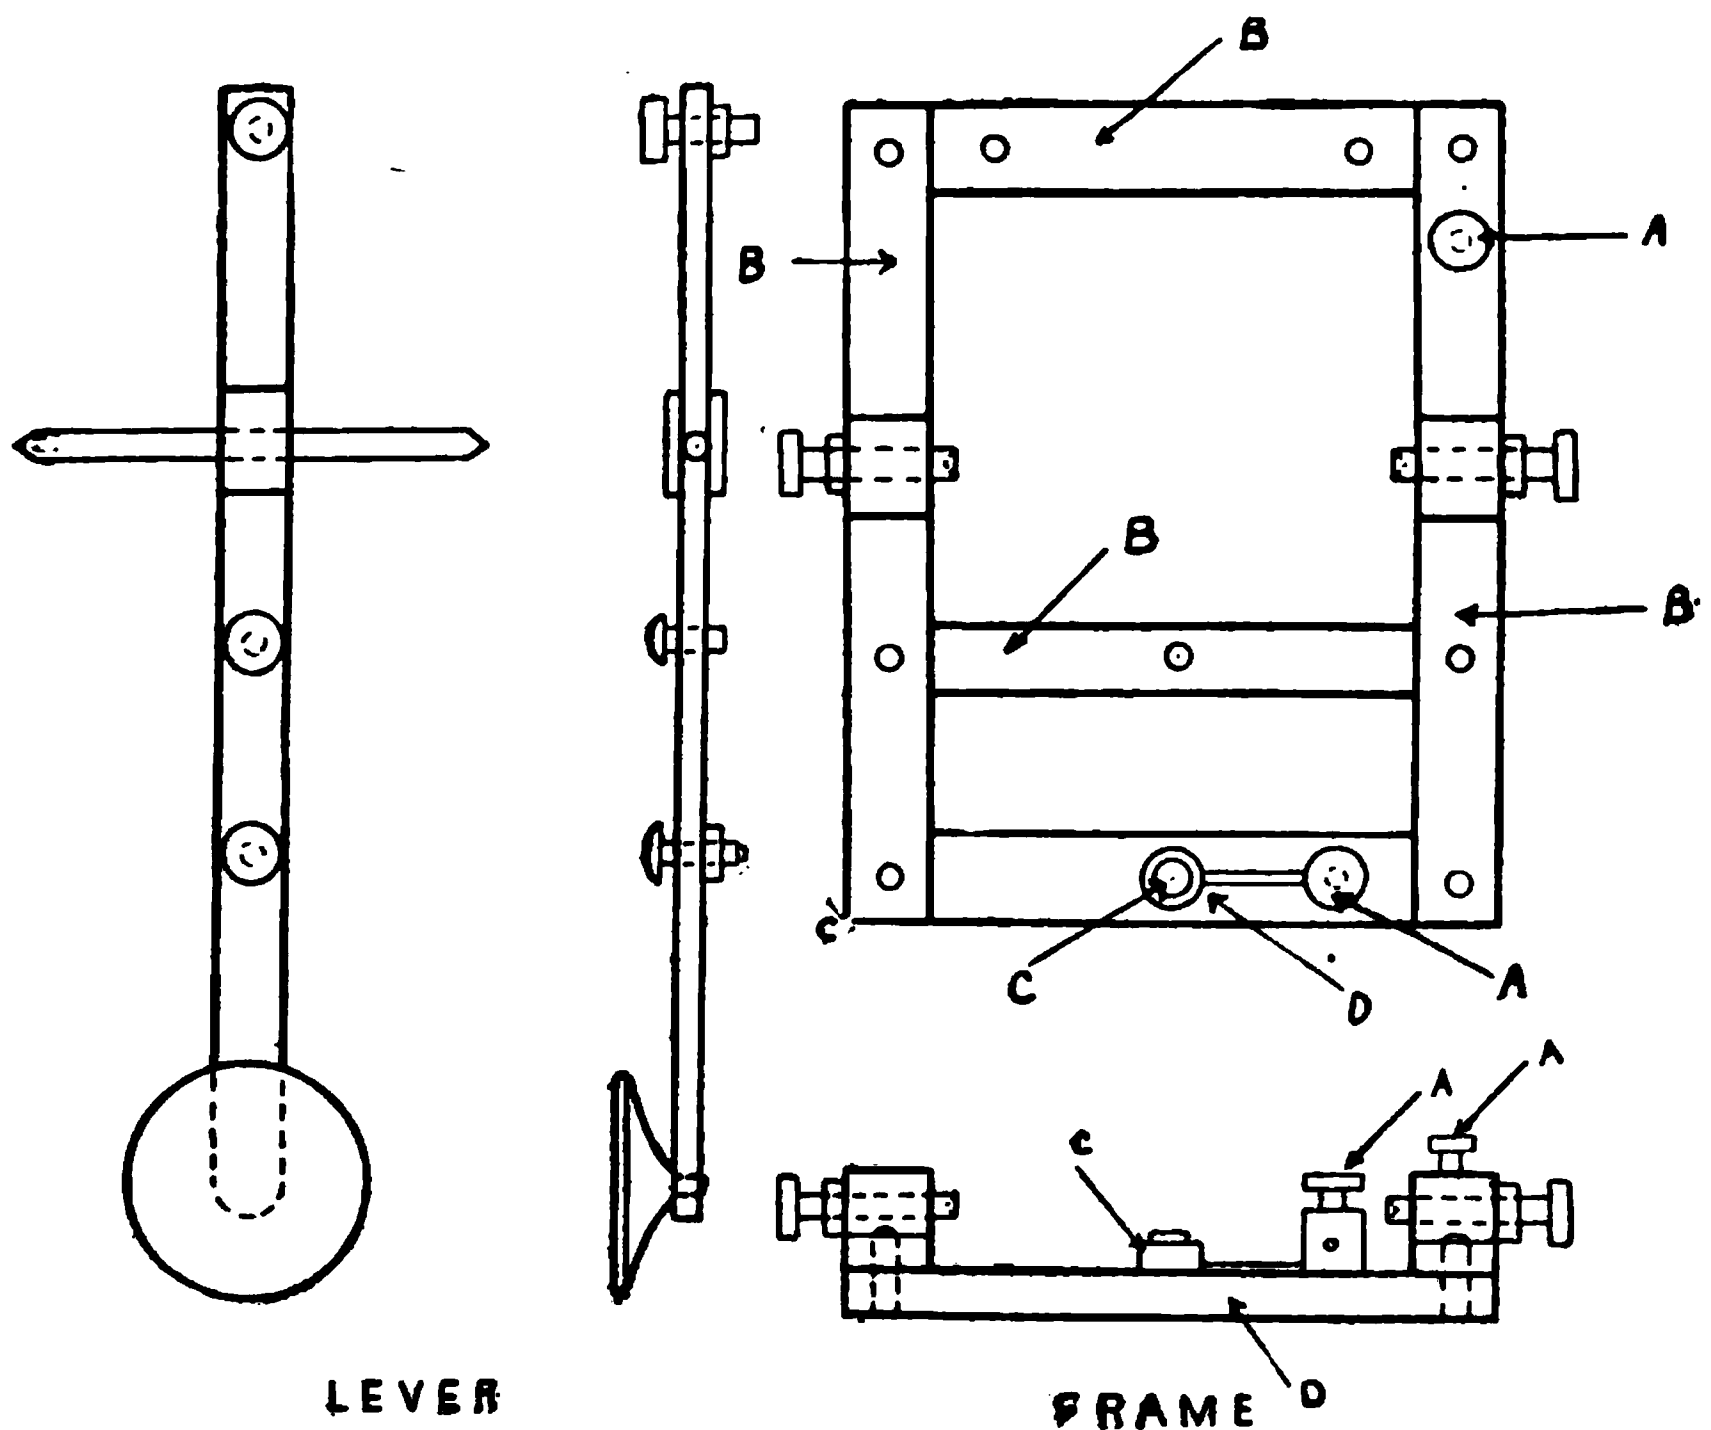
Key. A, Binding post; B, metal; C, contact; D, insulator.
